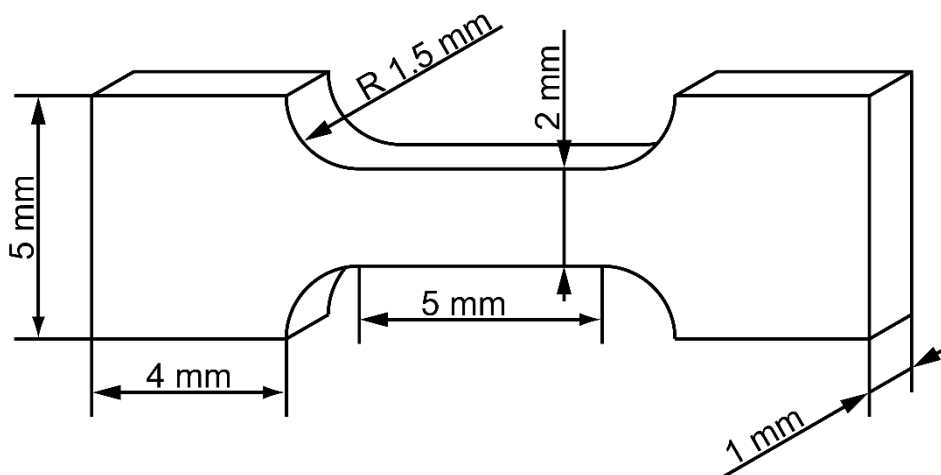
Schematic illustration and dimensions of the specimens used for tensile tests.
